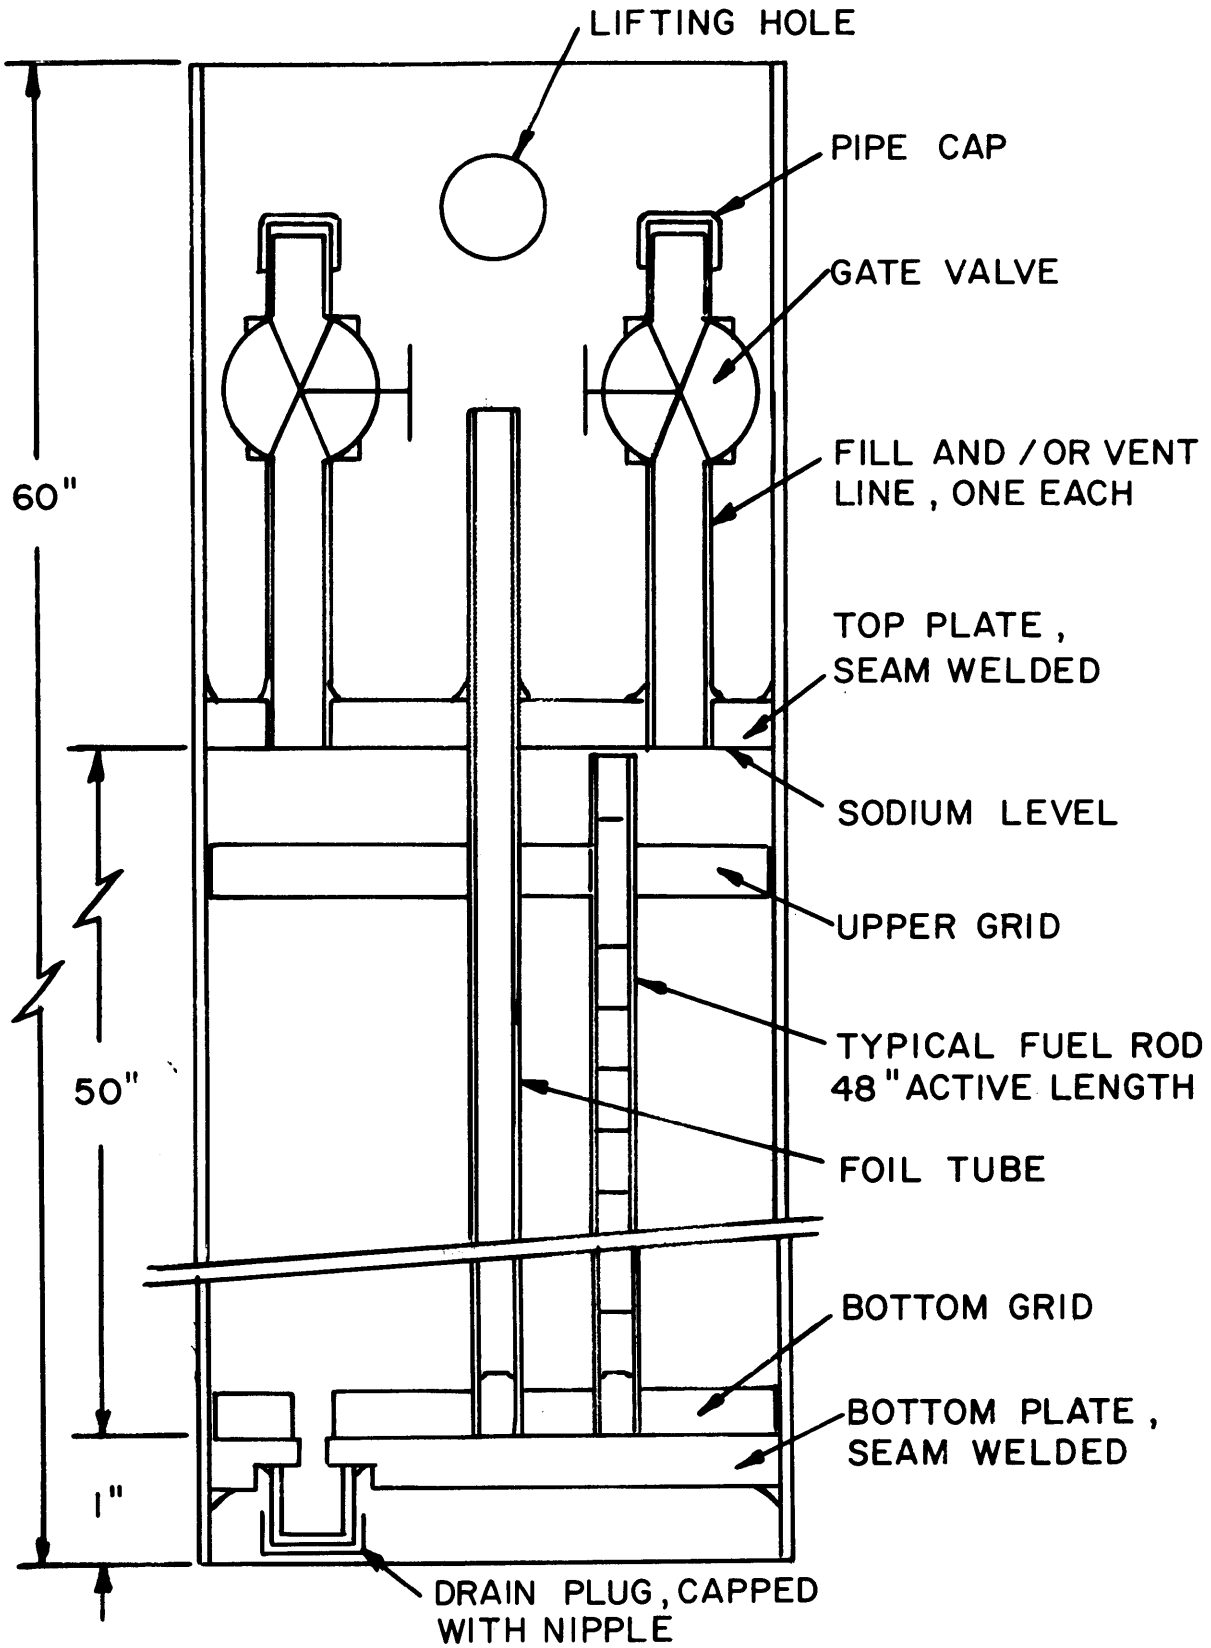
SPECIAL SUBASSEMBLY SECTION VIEW
